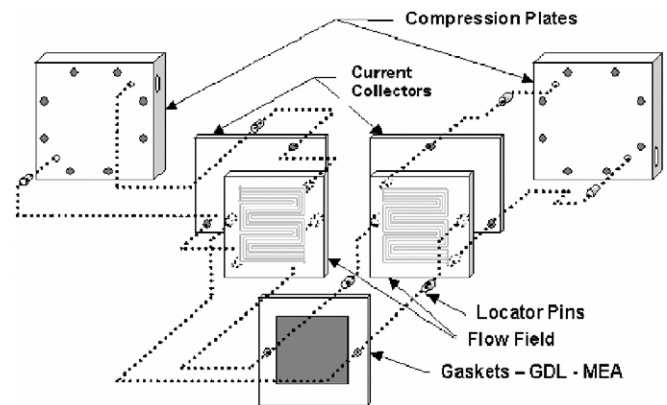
Exploded view of the 50 cm<sup>2</sup> fuel cell used in these measurements.
